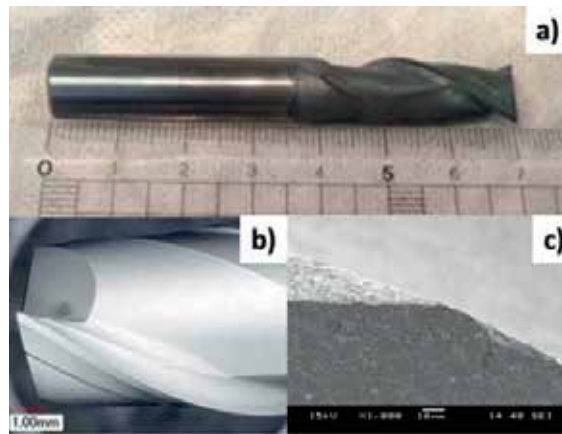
Ashing of CVD-diamond coating on the WC (Co) standard specimen under (250 V;  $-500$  V; 45 Pa; 3.6 ks). (a) Surface of ashed specimen before cleansing, (b) Ashed tool edge, (c) SEM image of tool edge.
